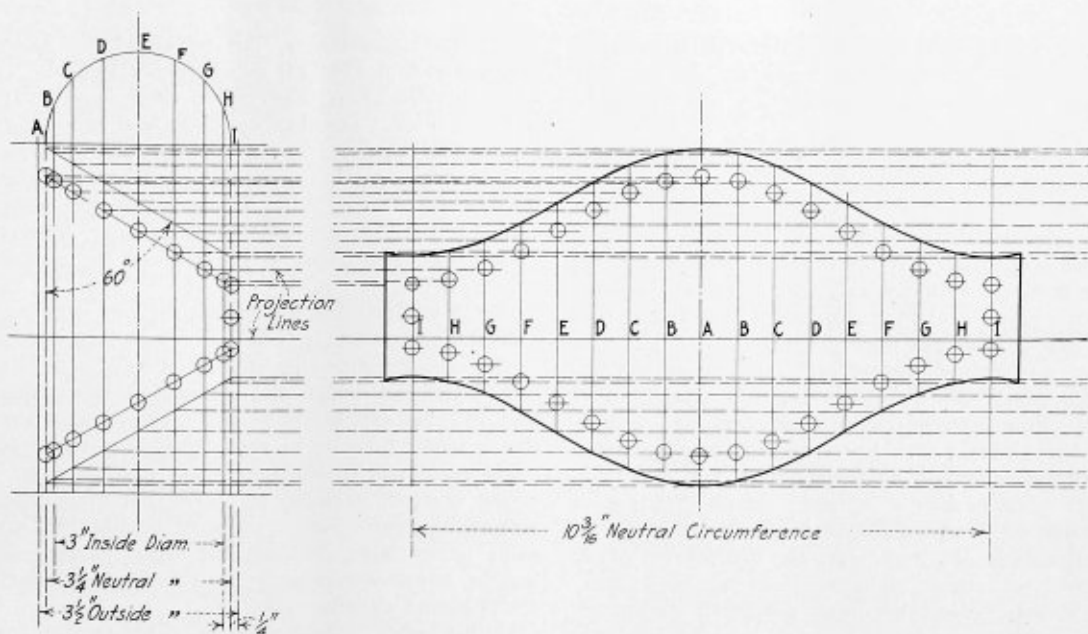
Layout of Two-Piece Elbow with Butt Seams
